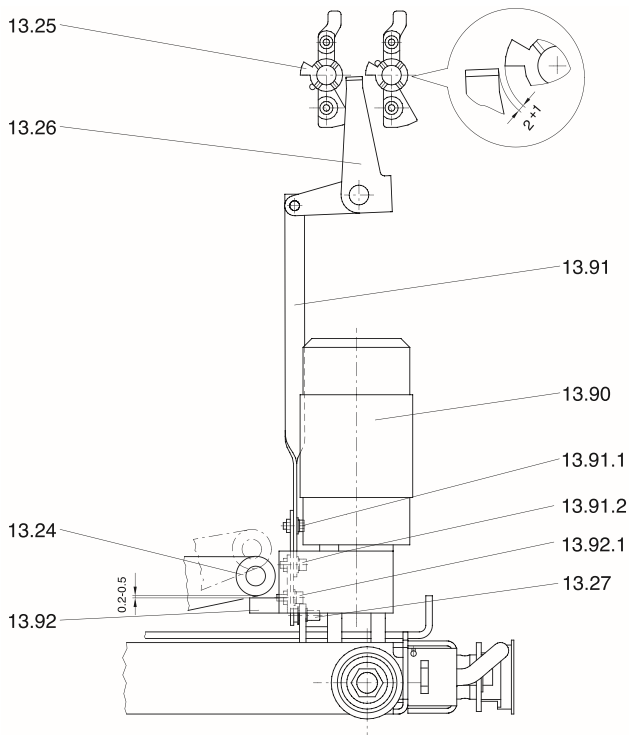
/5: Detail in the area of a withdrawable part with travel motor, viewed from the left-hand side
